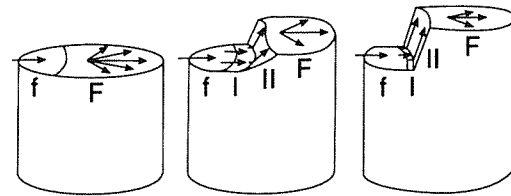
Evolution with cold drawing of fracture surfaces in LAD, from slightly to heavily drawn steels (left to right). Increasingly anisotropic behaviour with cold drawing (f: fatigue; I: mode I propagation; II: mixed mode propagation; F: final fracture by cleavage).
